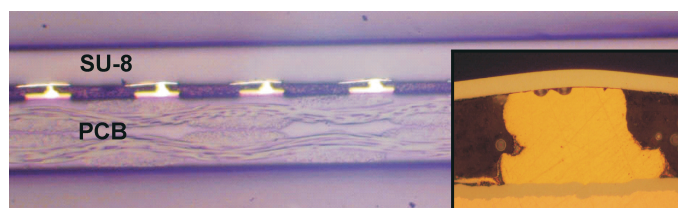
SEM image of a cut through the SU-8 chip and the PCB after ACF flip chip bonding. The bumps on the PCB were clearly in contact with the contact pads on the SU-8 chip. The inset shows a close up of a single bump and two conducting particles. The contact pad on the SU-8 chip was deflecting due to the pressure from the bump.
